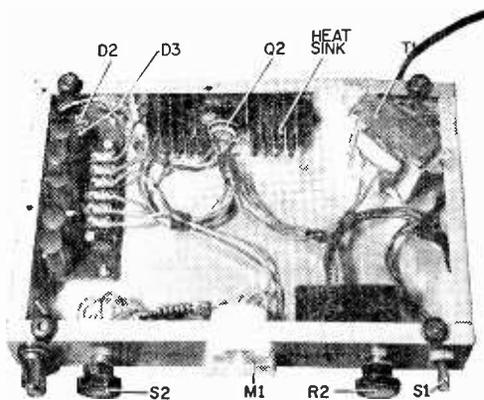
Power-transistor mounting is much easier on pre-drilled heat sink—otherwise use insulating washer as a drill template.
